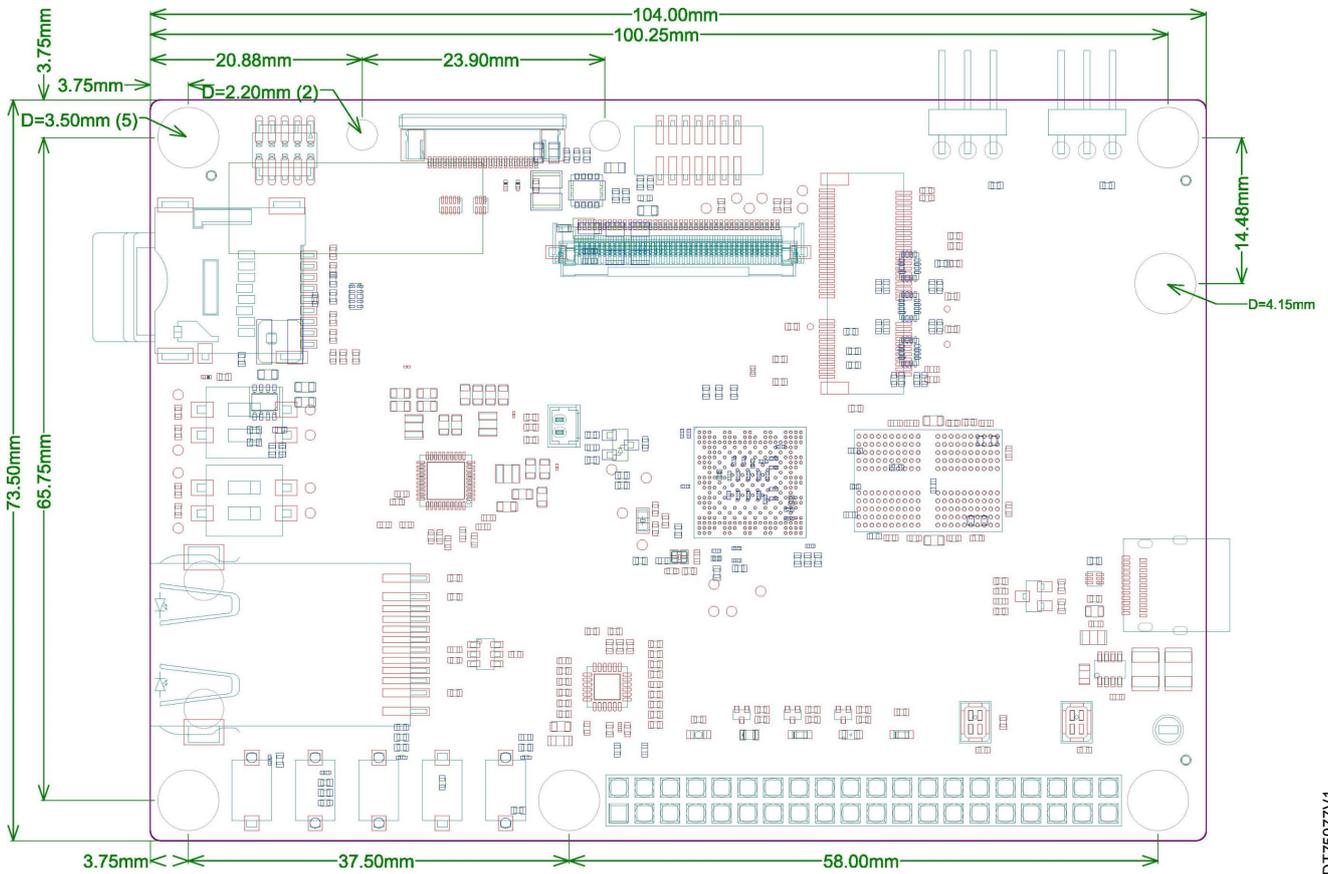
STM32MP215F-DK PCB layout (top side)
